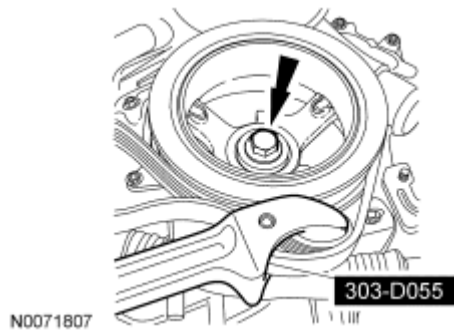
Removing Crankshaft Pulley Bolt & Washer Using Strap Wrench
